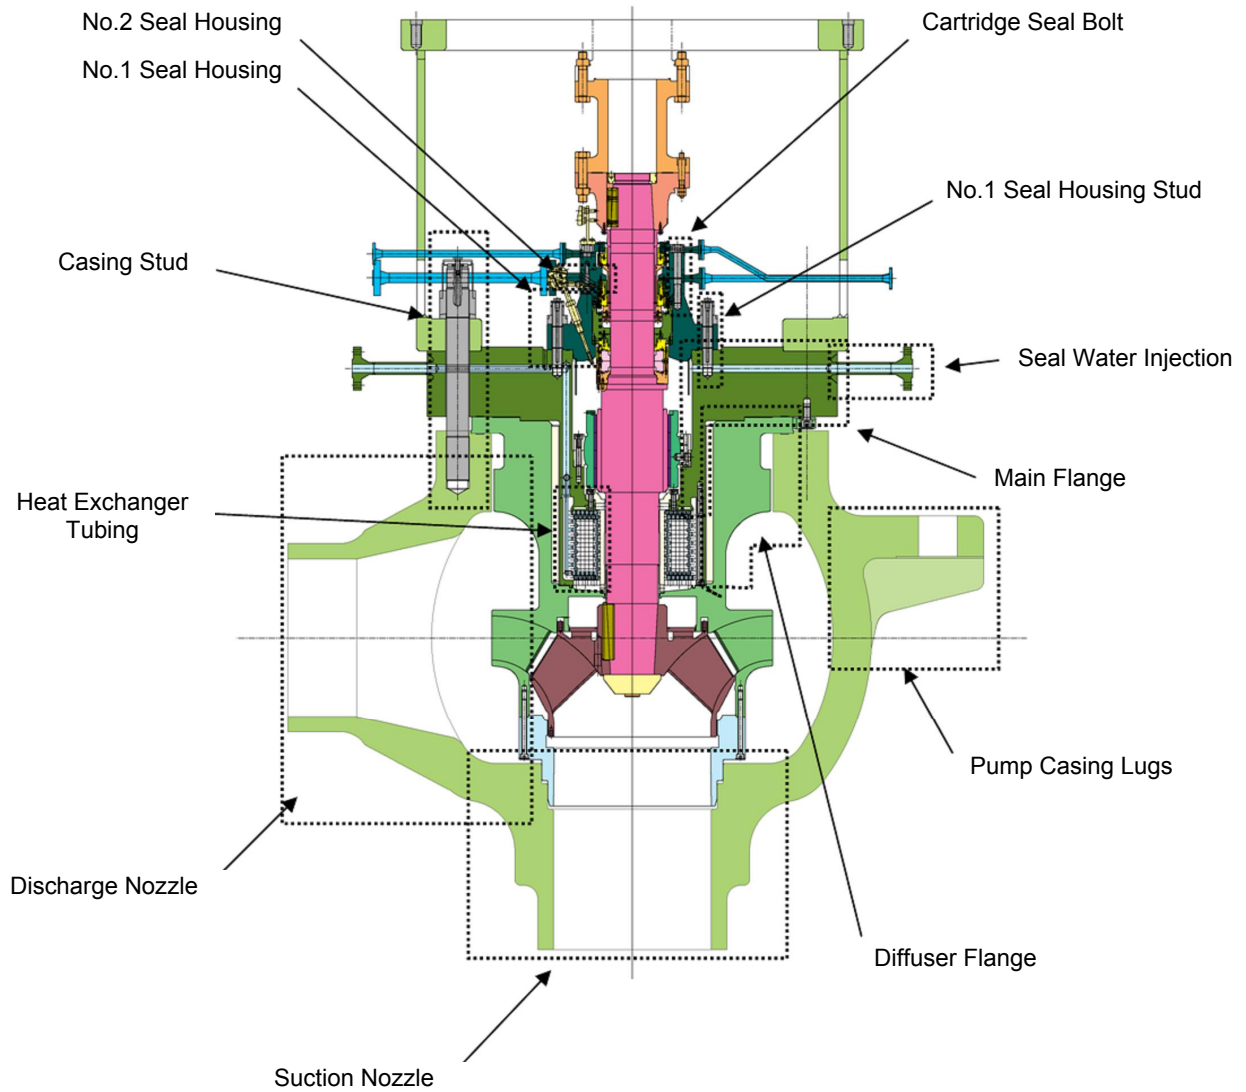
Reactor Coolant Pump Component and Evaluated Parts
